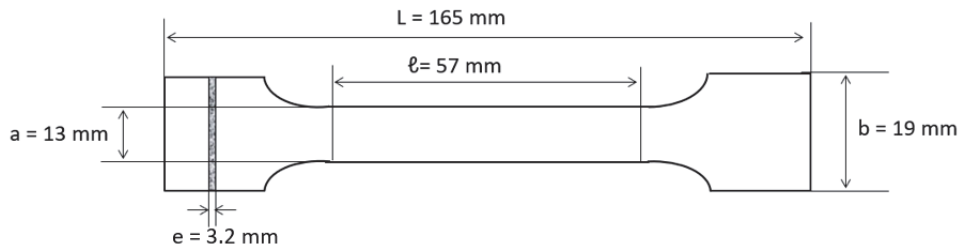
Dimensions of specimens printed according to the ASTM D638 Type 1 standard.
